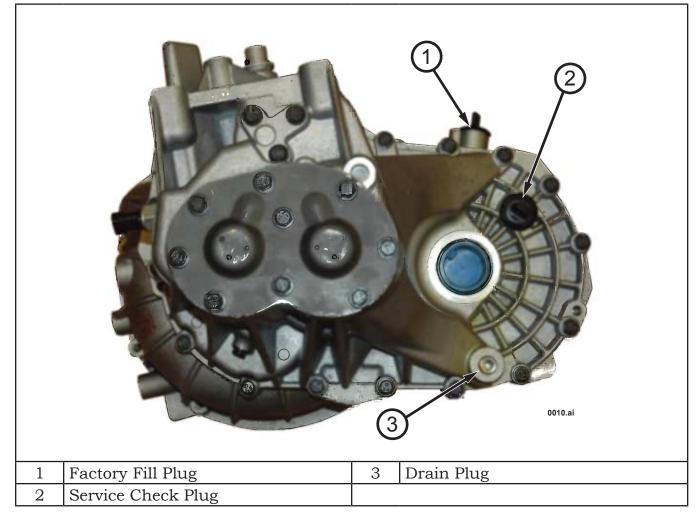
T355 Transaxle Drain and Fill Plug Locations
